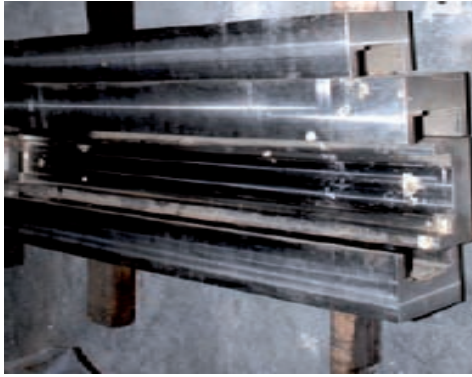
Inclined Fuel Transfer Machine Tilting Rails
